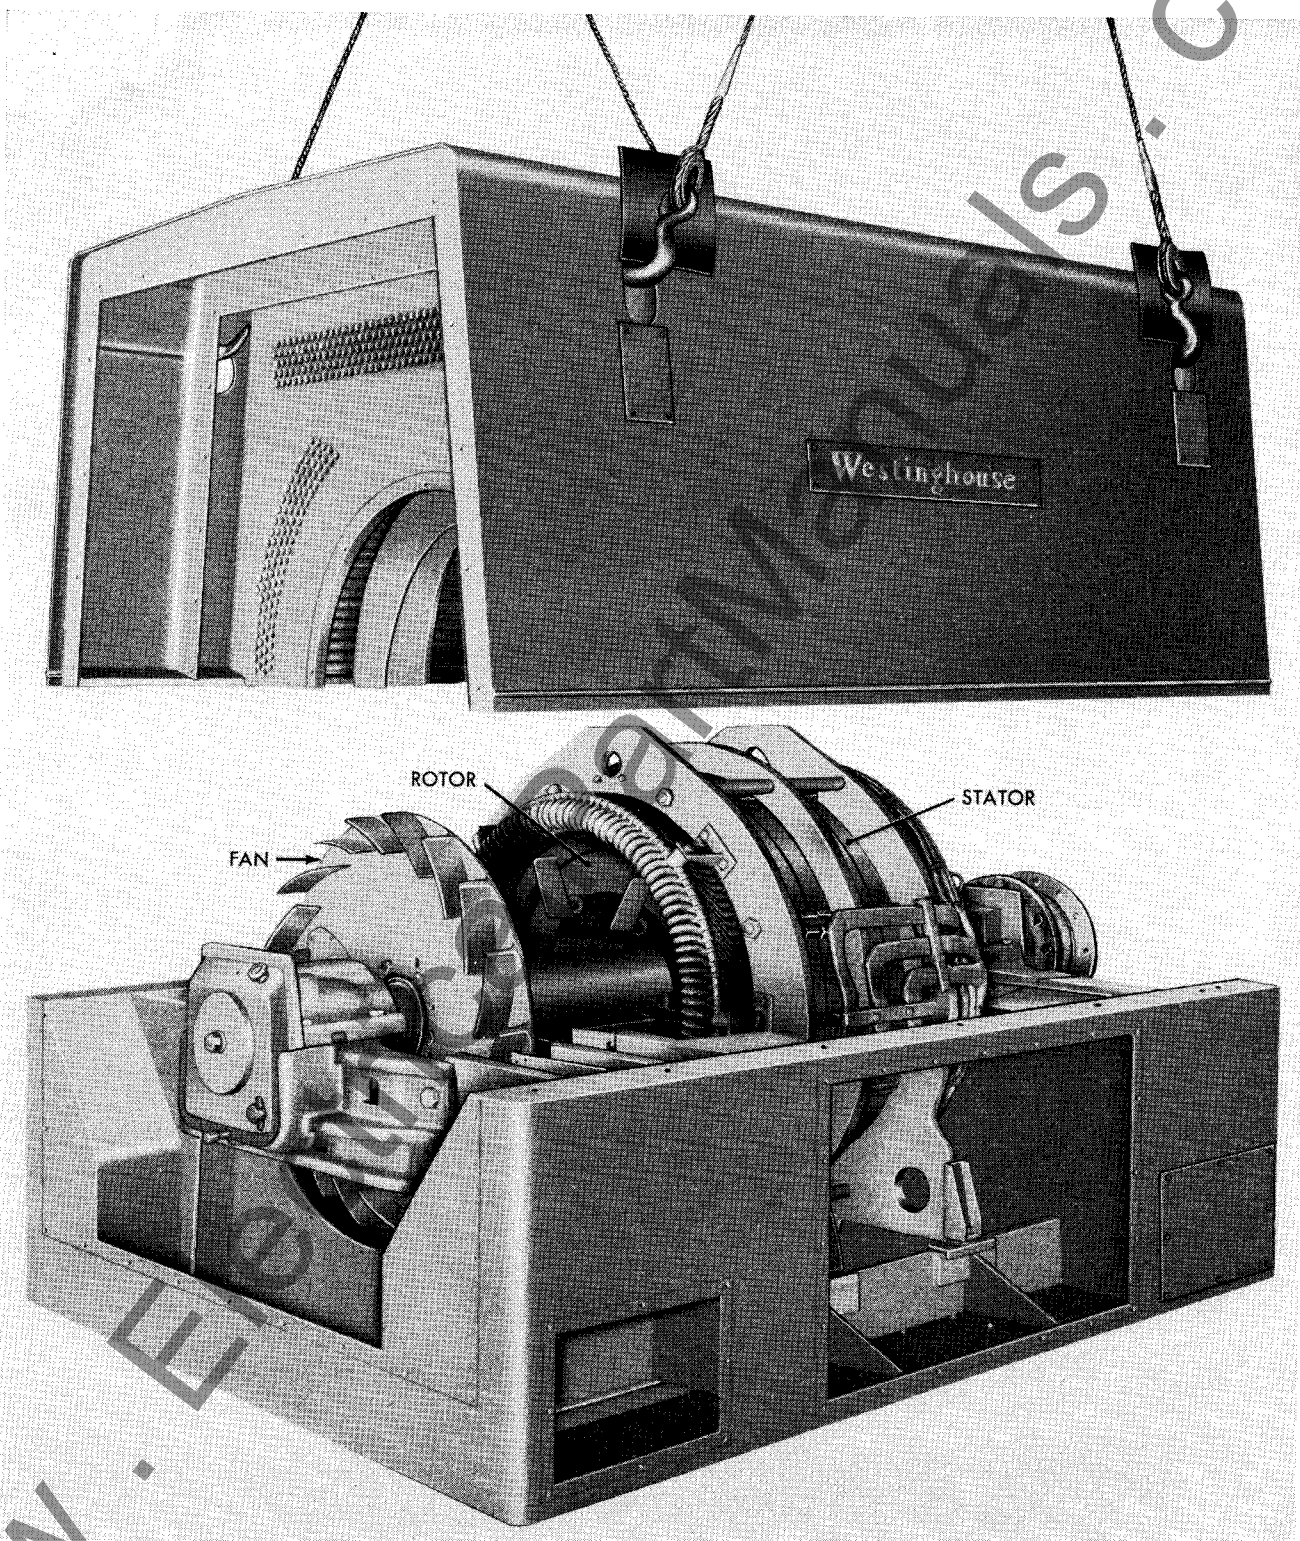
Totally Enclosed Fan-Cooled F/A Motor; Partially Disassembled to Show Construction
